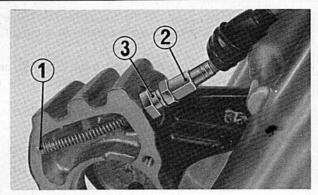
(1) Wire end (2) Adjusting bolt (3) Brake cable bolt
